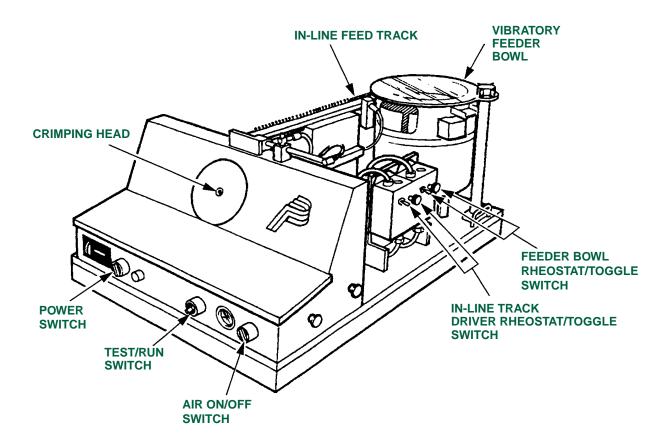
PICO MODEL 600 AUTOMATIC FEED CRIMPING MACHINE
